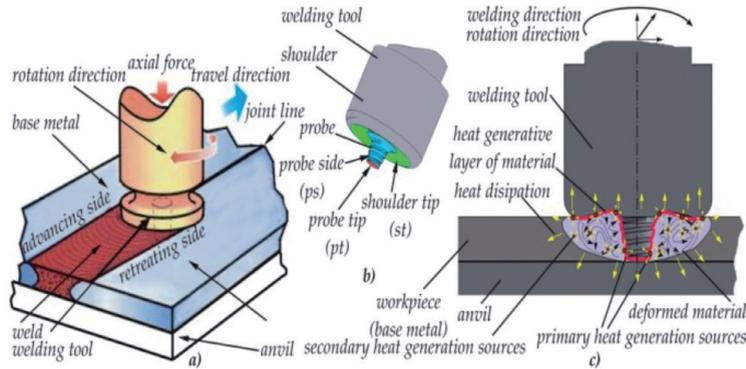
a) Friction Stir Welding Setup, b) Tool Nomenclature, c) Heat generation and plastic deformation in FSW process [5].
